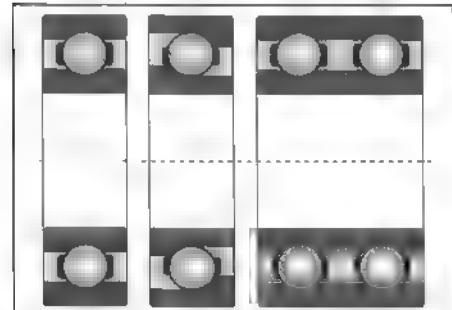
Three different types of ball bearing: from left to right, a single row, angular contact and double row.
